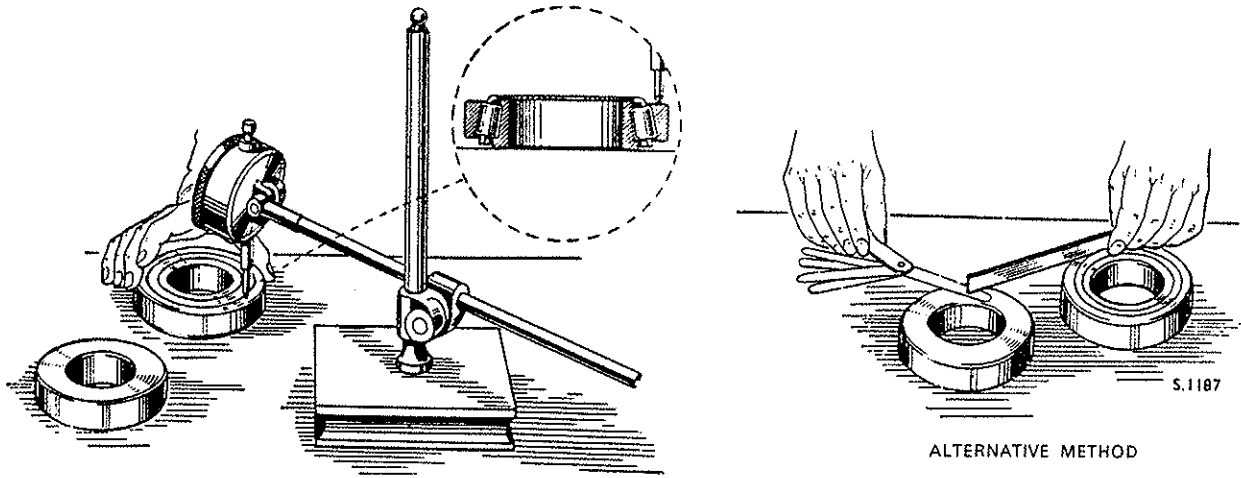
Measuring differences in thickness between the dummy bearing and the actual differential support bearing. (On the left: Measuring by means of a clock gauge (preferred method) and on the right using a straight edge and feeler gauges)
